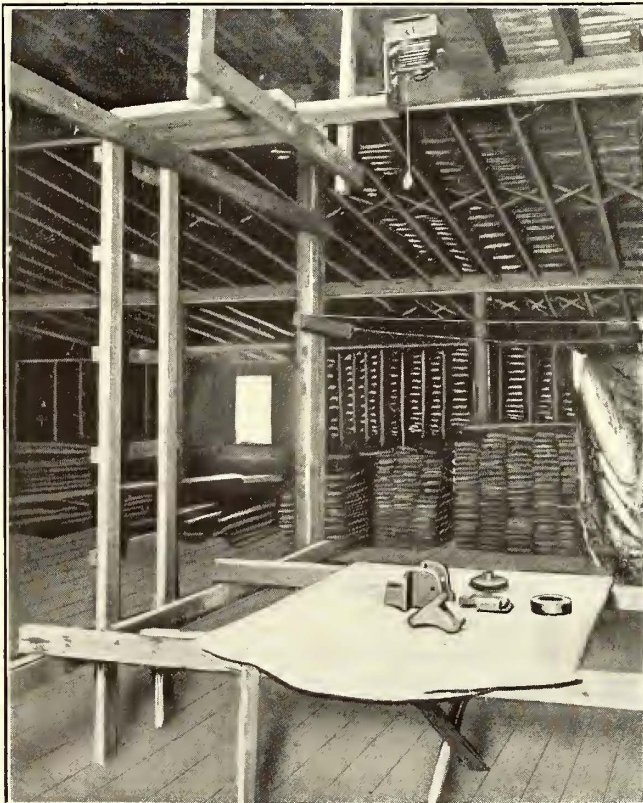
Boston & Northern Shops—Method of Photographing Equipment Parts
